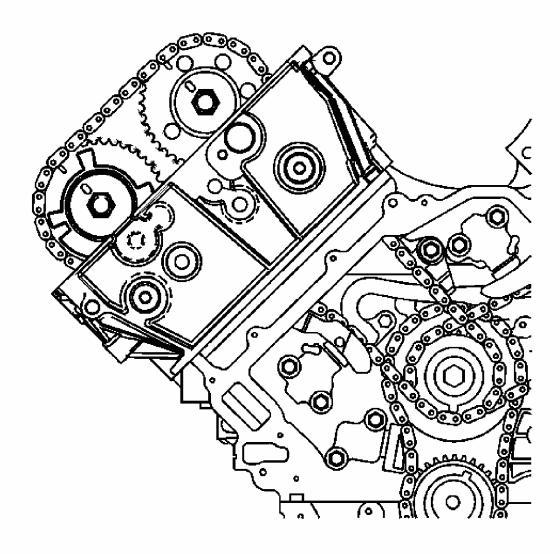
View Of Right Intake & Exhaust Camshafts Sprockets Courtesy of GENERAL MOTORS CORP.
